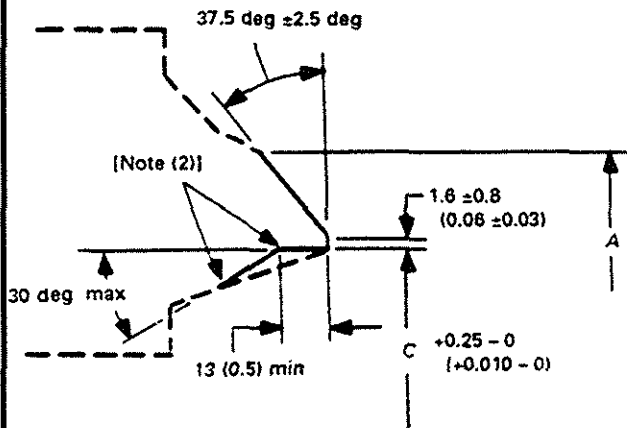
TYPICAL WELD BEVEL DETAILS FOR WALL THICKNESS NOT OVER 22 mm (0.88 in.)
